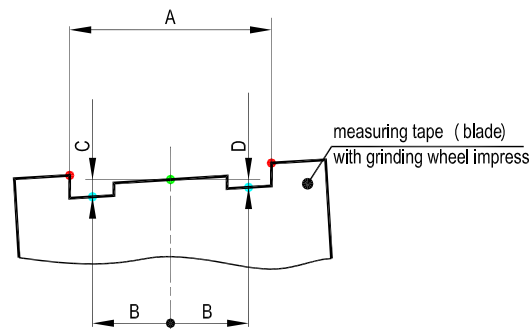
Schema of grinding wheel impress in case, that the blade isn't fixed well
